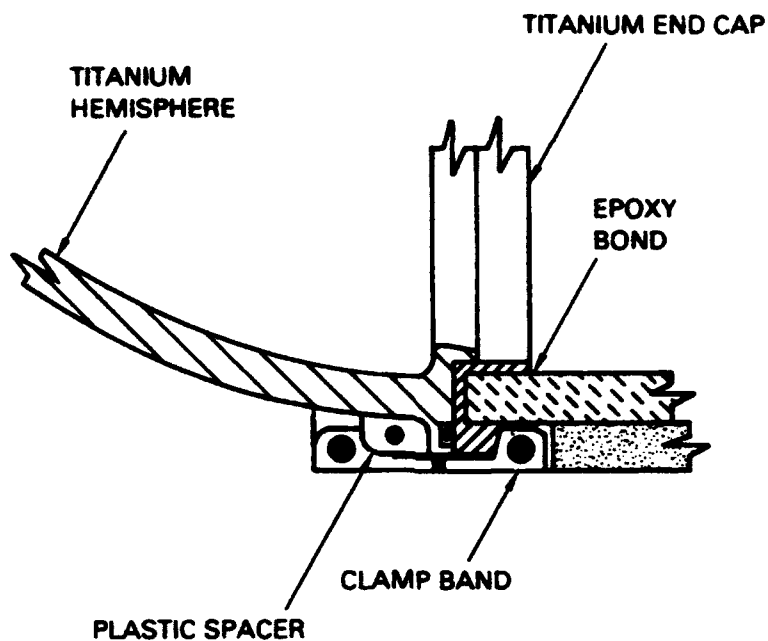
Arrangement for joining a metallic spherical bulkhead to ceramic cylinder using Mod 0 end cap and split wedge band clamp.
